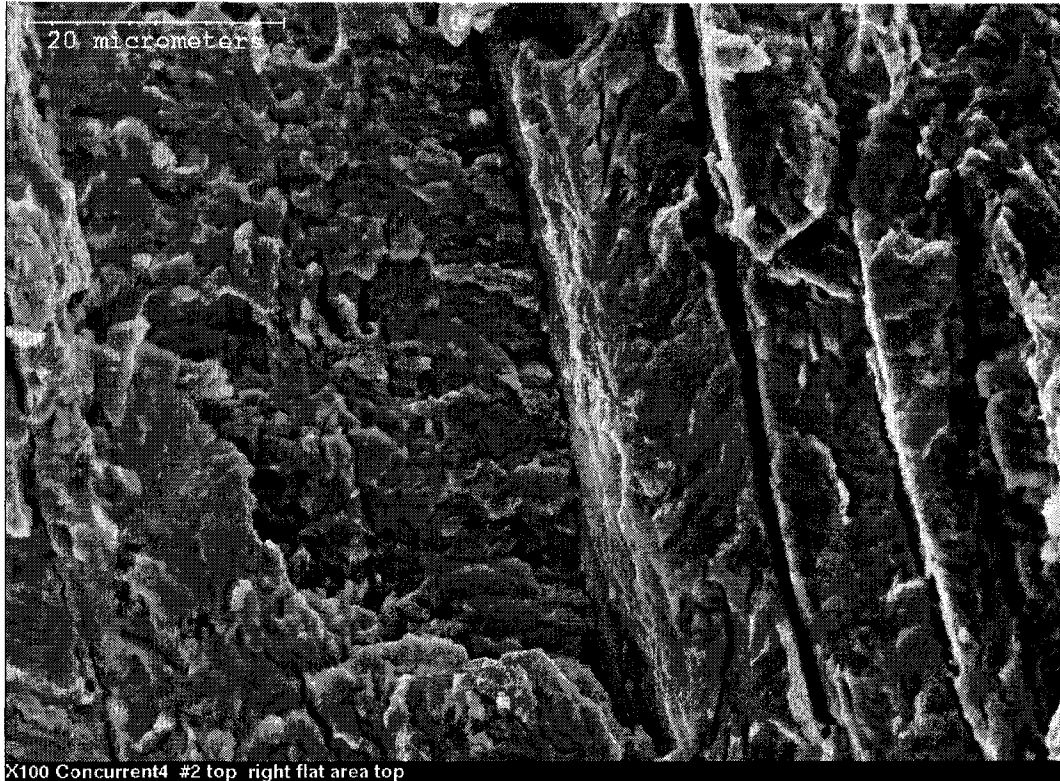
X100 fracture surface of precharged 4th cycle, cleavage (high mag)
